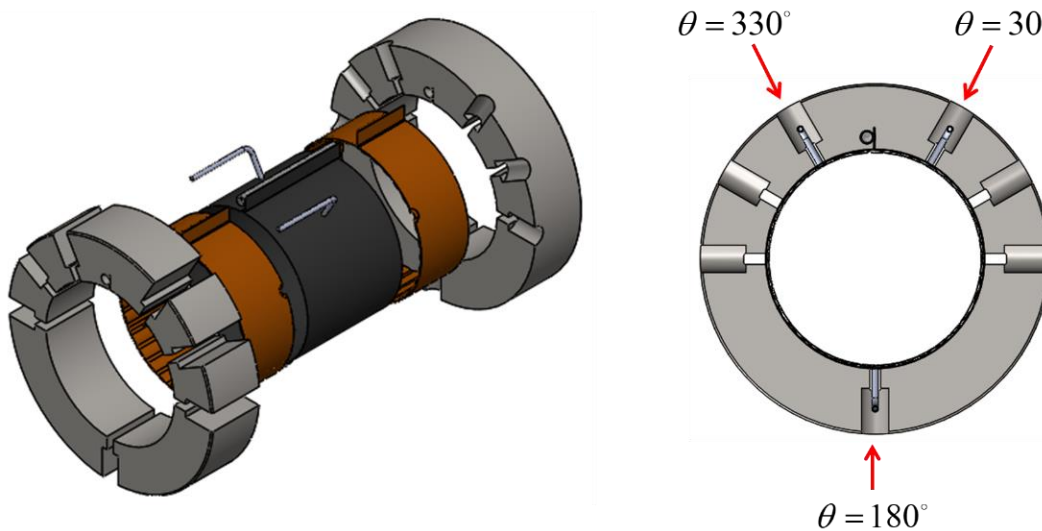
Front-view and isometric-view of case-1 single-pad HAFB
